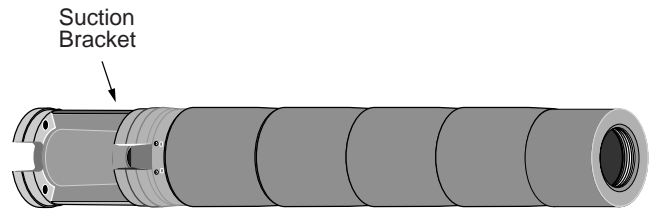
Disassemble pump, starting with suction bracket (left-hand threads).
